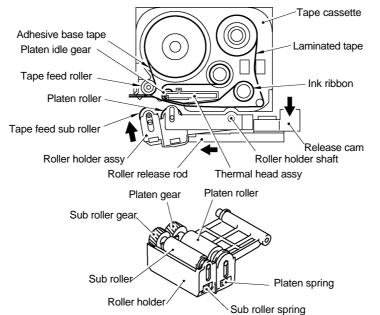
Roller Holder Assy Setting and Retracting Mechanism
